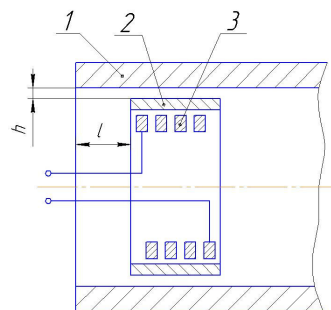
Scheme of process of welding protective rings with a pipe
